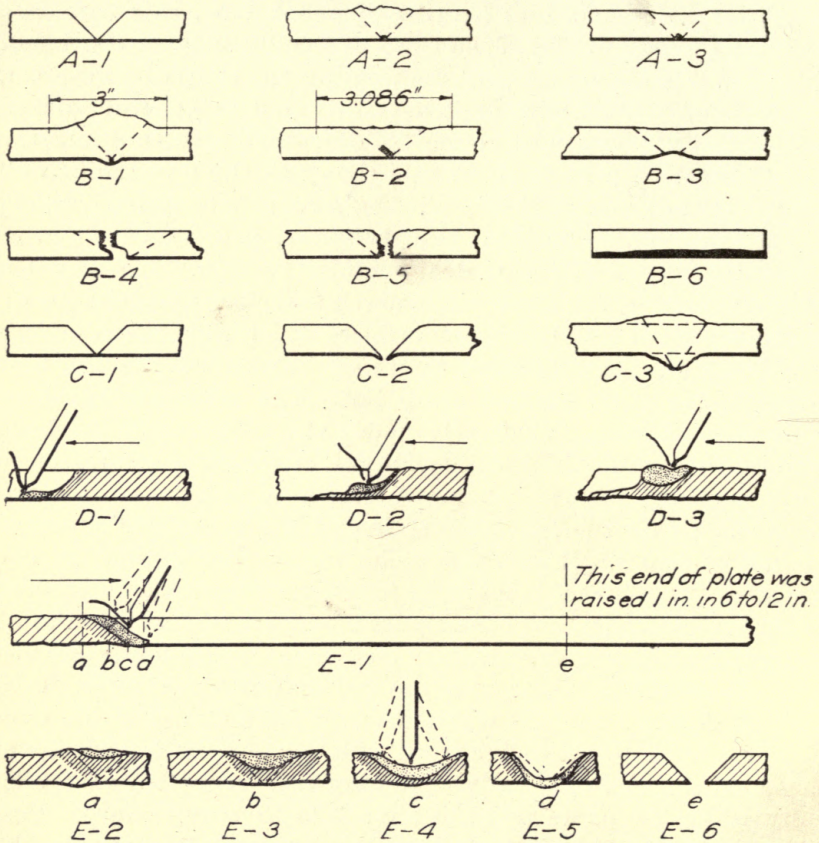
PROGRESS OF WELDING—SECOND SERIES.
